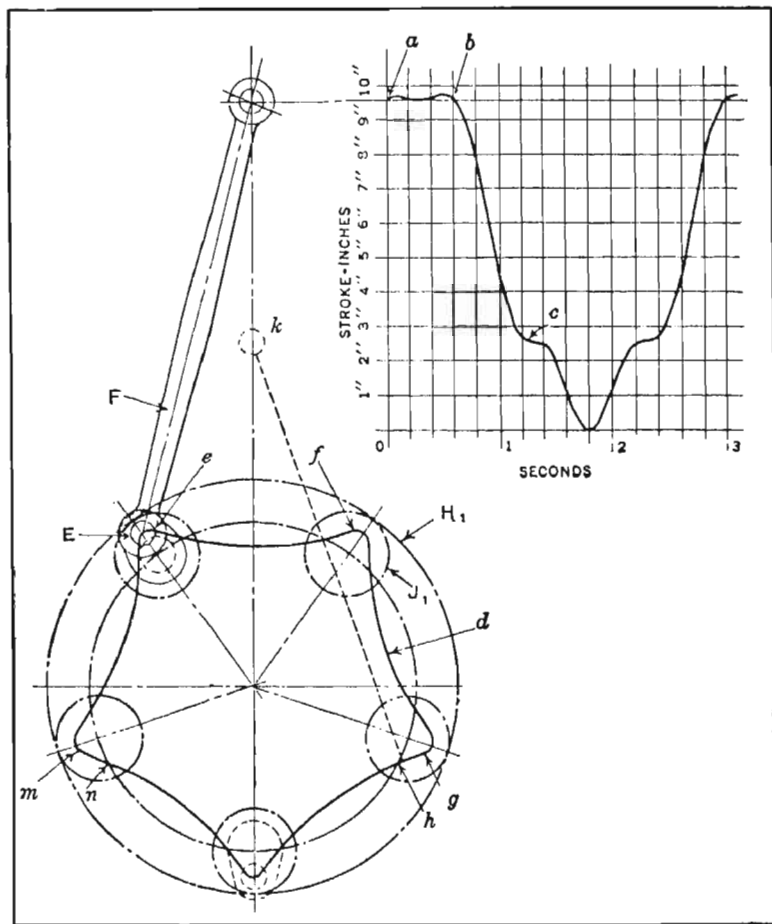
Path Followed by Eccentric Crankpin, and Chart Showing Dwelling Periods
